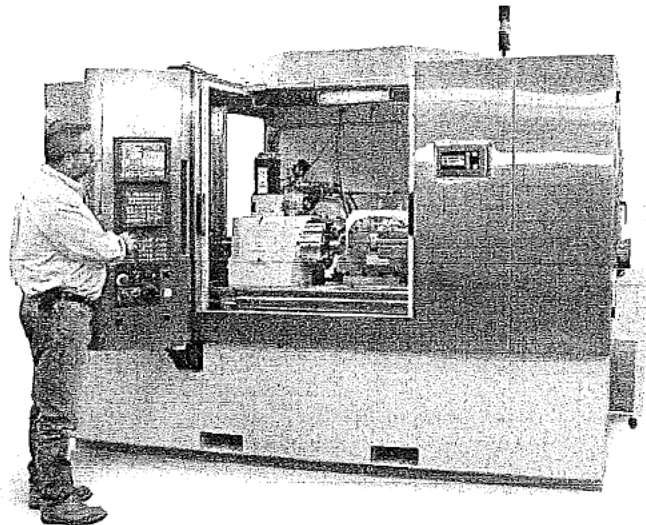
Drake GS:TE/TI 350 Thread Grinder
